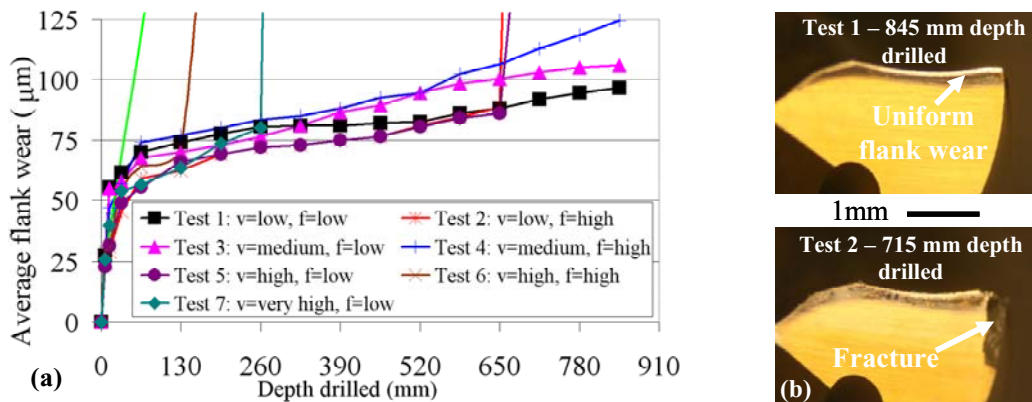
Tool life results; (a) flank wear against depth drilled; (b) wear scar photographs
